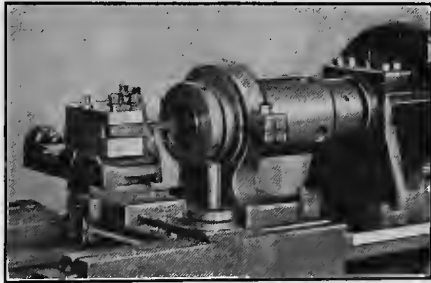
ENGINE LATHE RIGGED WITH SPECIAL CHUCK AND TOOL BLOCK FOR FINISHING OPEN END
